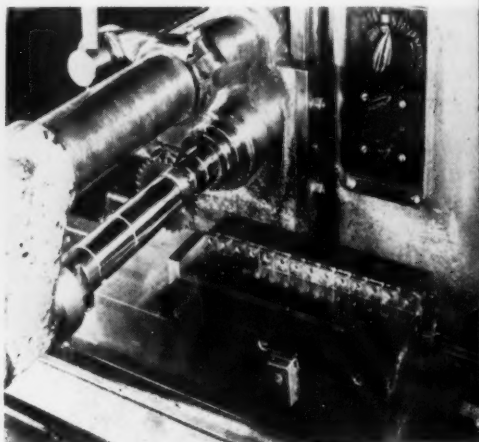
Close-up showing the slotting of 14 small parts on a special magnetic fixture.
